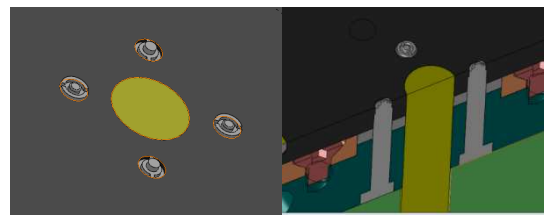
CAD drawing of the moulding cavities and the central ejector pin in detail.
